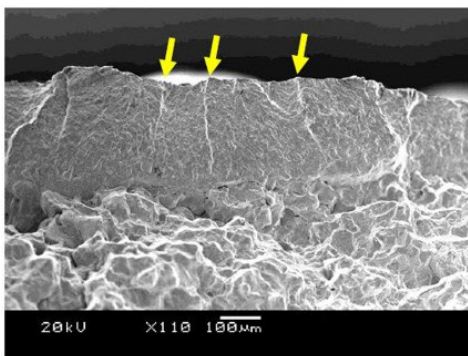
fatigue fractures in wind generator rotor wye ring prior to failure
